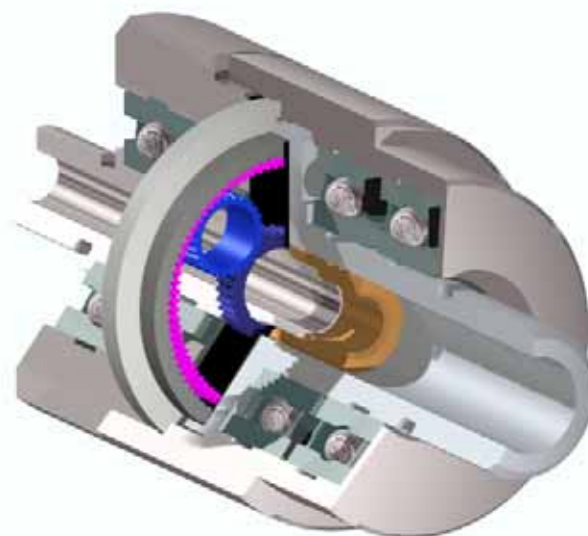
Micro Harmonic Drive[®] MHD gearbox
